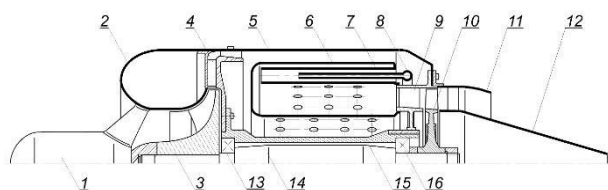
Cross section of the GTM 120 engine and its basic elements: 1 – electric starter, 2 – inlet, 3 – compressor rotor, 4 – diffuser, 5 – combustion chamber case, 6 – combustion liner, 7 – evaporators, 8 – fuel manifold, 9 – turbine nozzle ring, 10 – turbine rotor, 11 – outlet nozzle, 12 – central cone of the exhaust system, 13, 16 – bearings, 14 – shaft, 15 – shaft sleeve (own elaboration)
